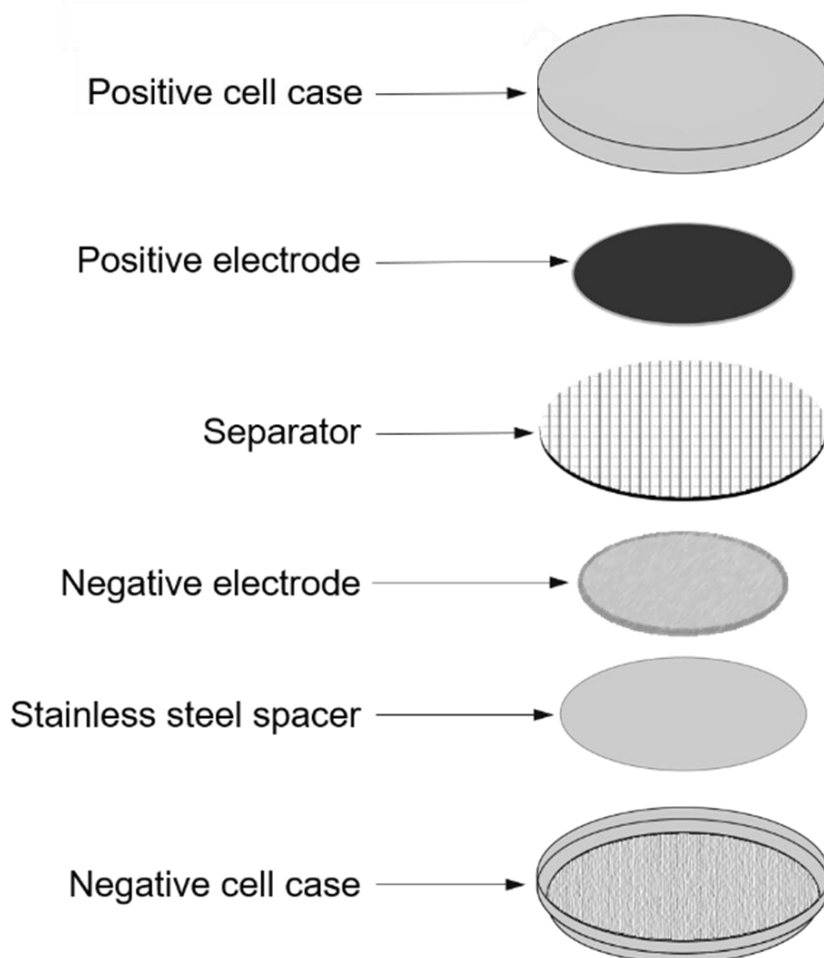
Schematic showing an exploded view of a coin cell. Spring not shown.
